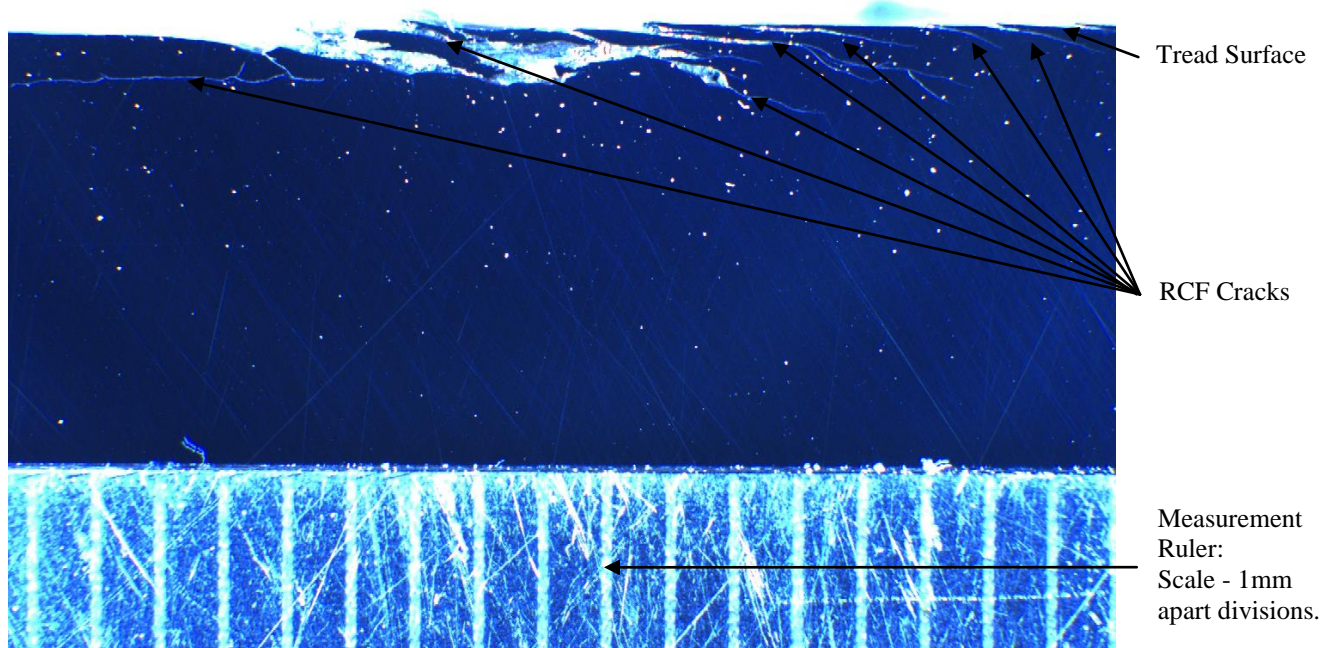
Image of as-polished sectioned HSR1 wheel sample showing sub-surface cracking in the railway wheel HSR1 at the position of minimum run-out.
